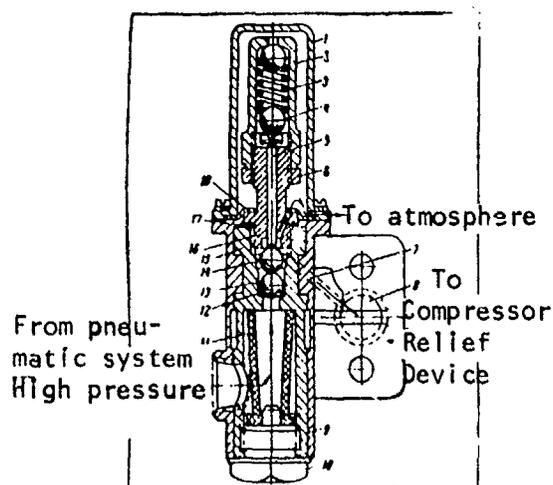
Pressure Regulator: 1, case; 2, adjusting cap; 3 and 12, springs; 4, support ball; 5, shaft; 6, counter nut; 7, channel; 8 and 11, filters; 9, regulator body; 10, filter plug; 13, intake valve; 14, exhaust valve; 15, intake valve seat; 16, exhaust valve seat; 17, adjusting inserts; 18, stop washer
